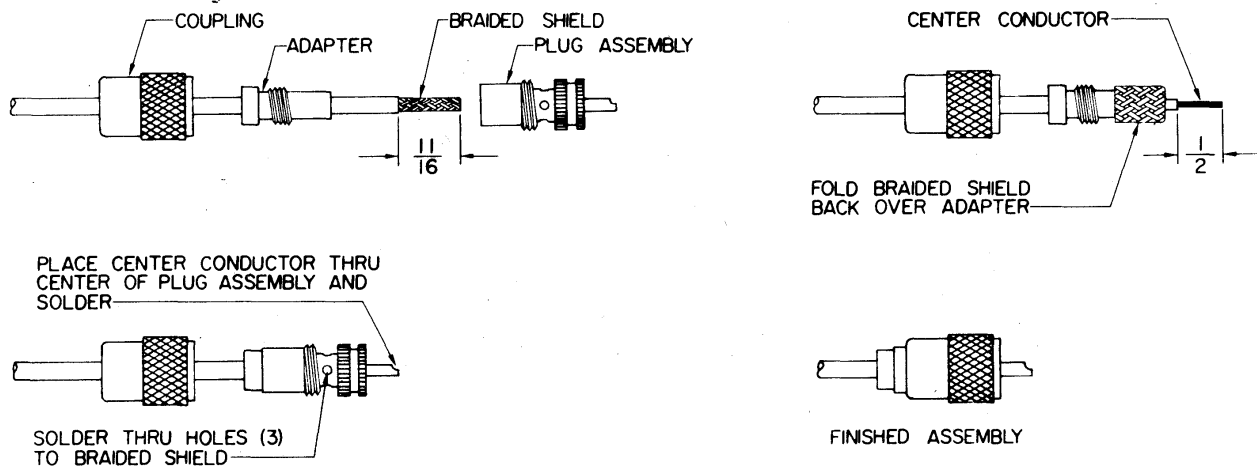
, CABLE CONNECTOR ASSEMBLY DIAGRAM
